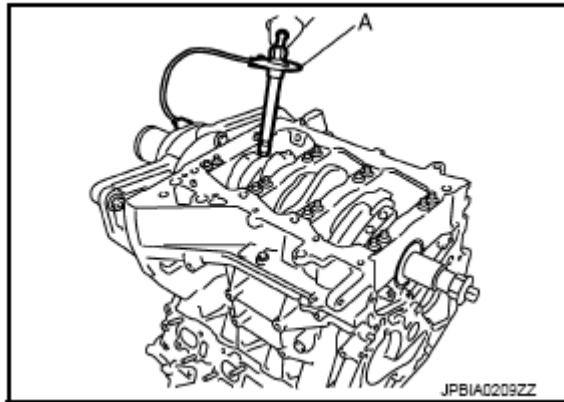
Measuring Connecting Rod Bolt Tightening Angle Using Angle Wrench
